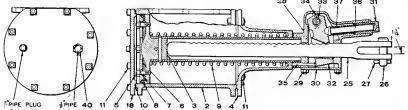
Load Brake Cylinder, 10 in. by 12 in., with Notched Push Rod and Enclosed Locking Mechanism, for Empty and Load Freight Brake Equipment.
